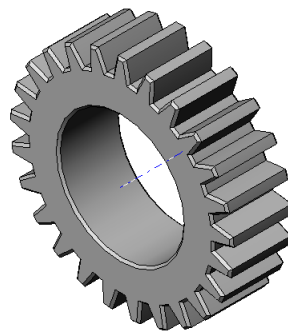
Isometric view of the Pinion (Generated by mech soft and Solidworks)
